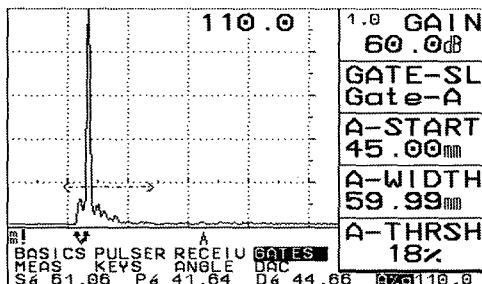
Ultrasonics signal of rail weld zone (head part)
